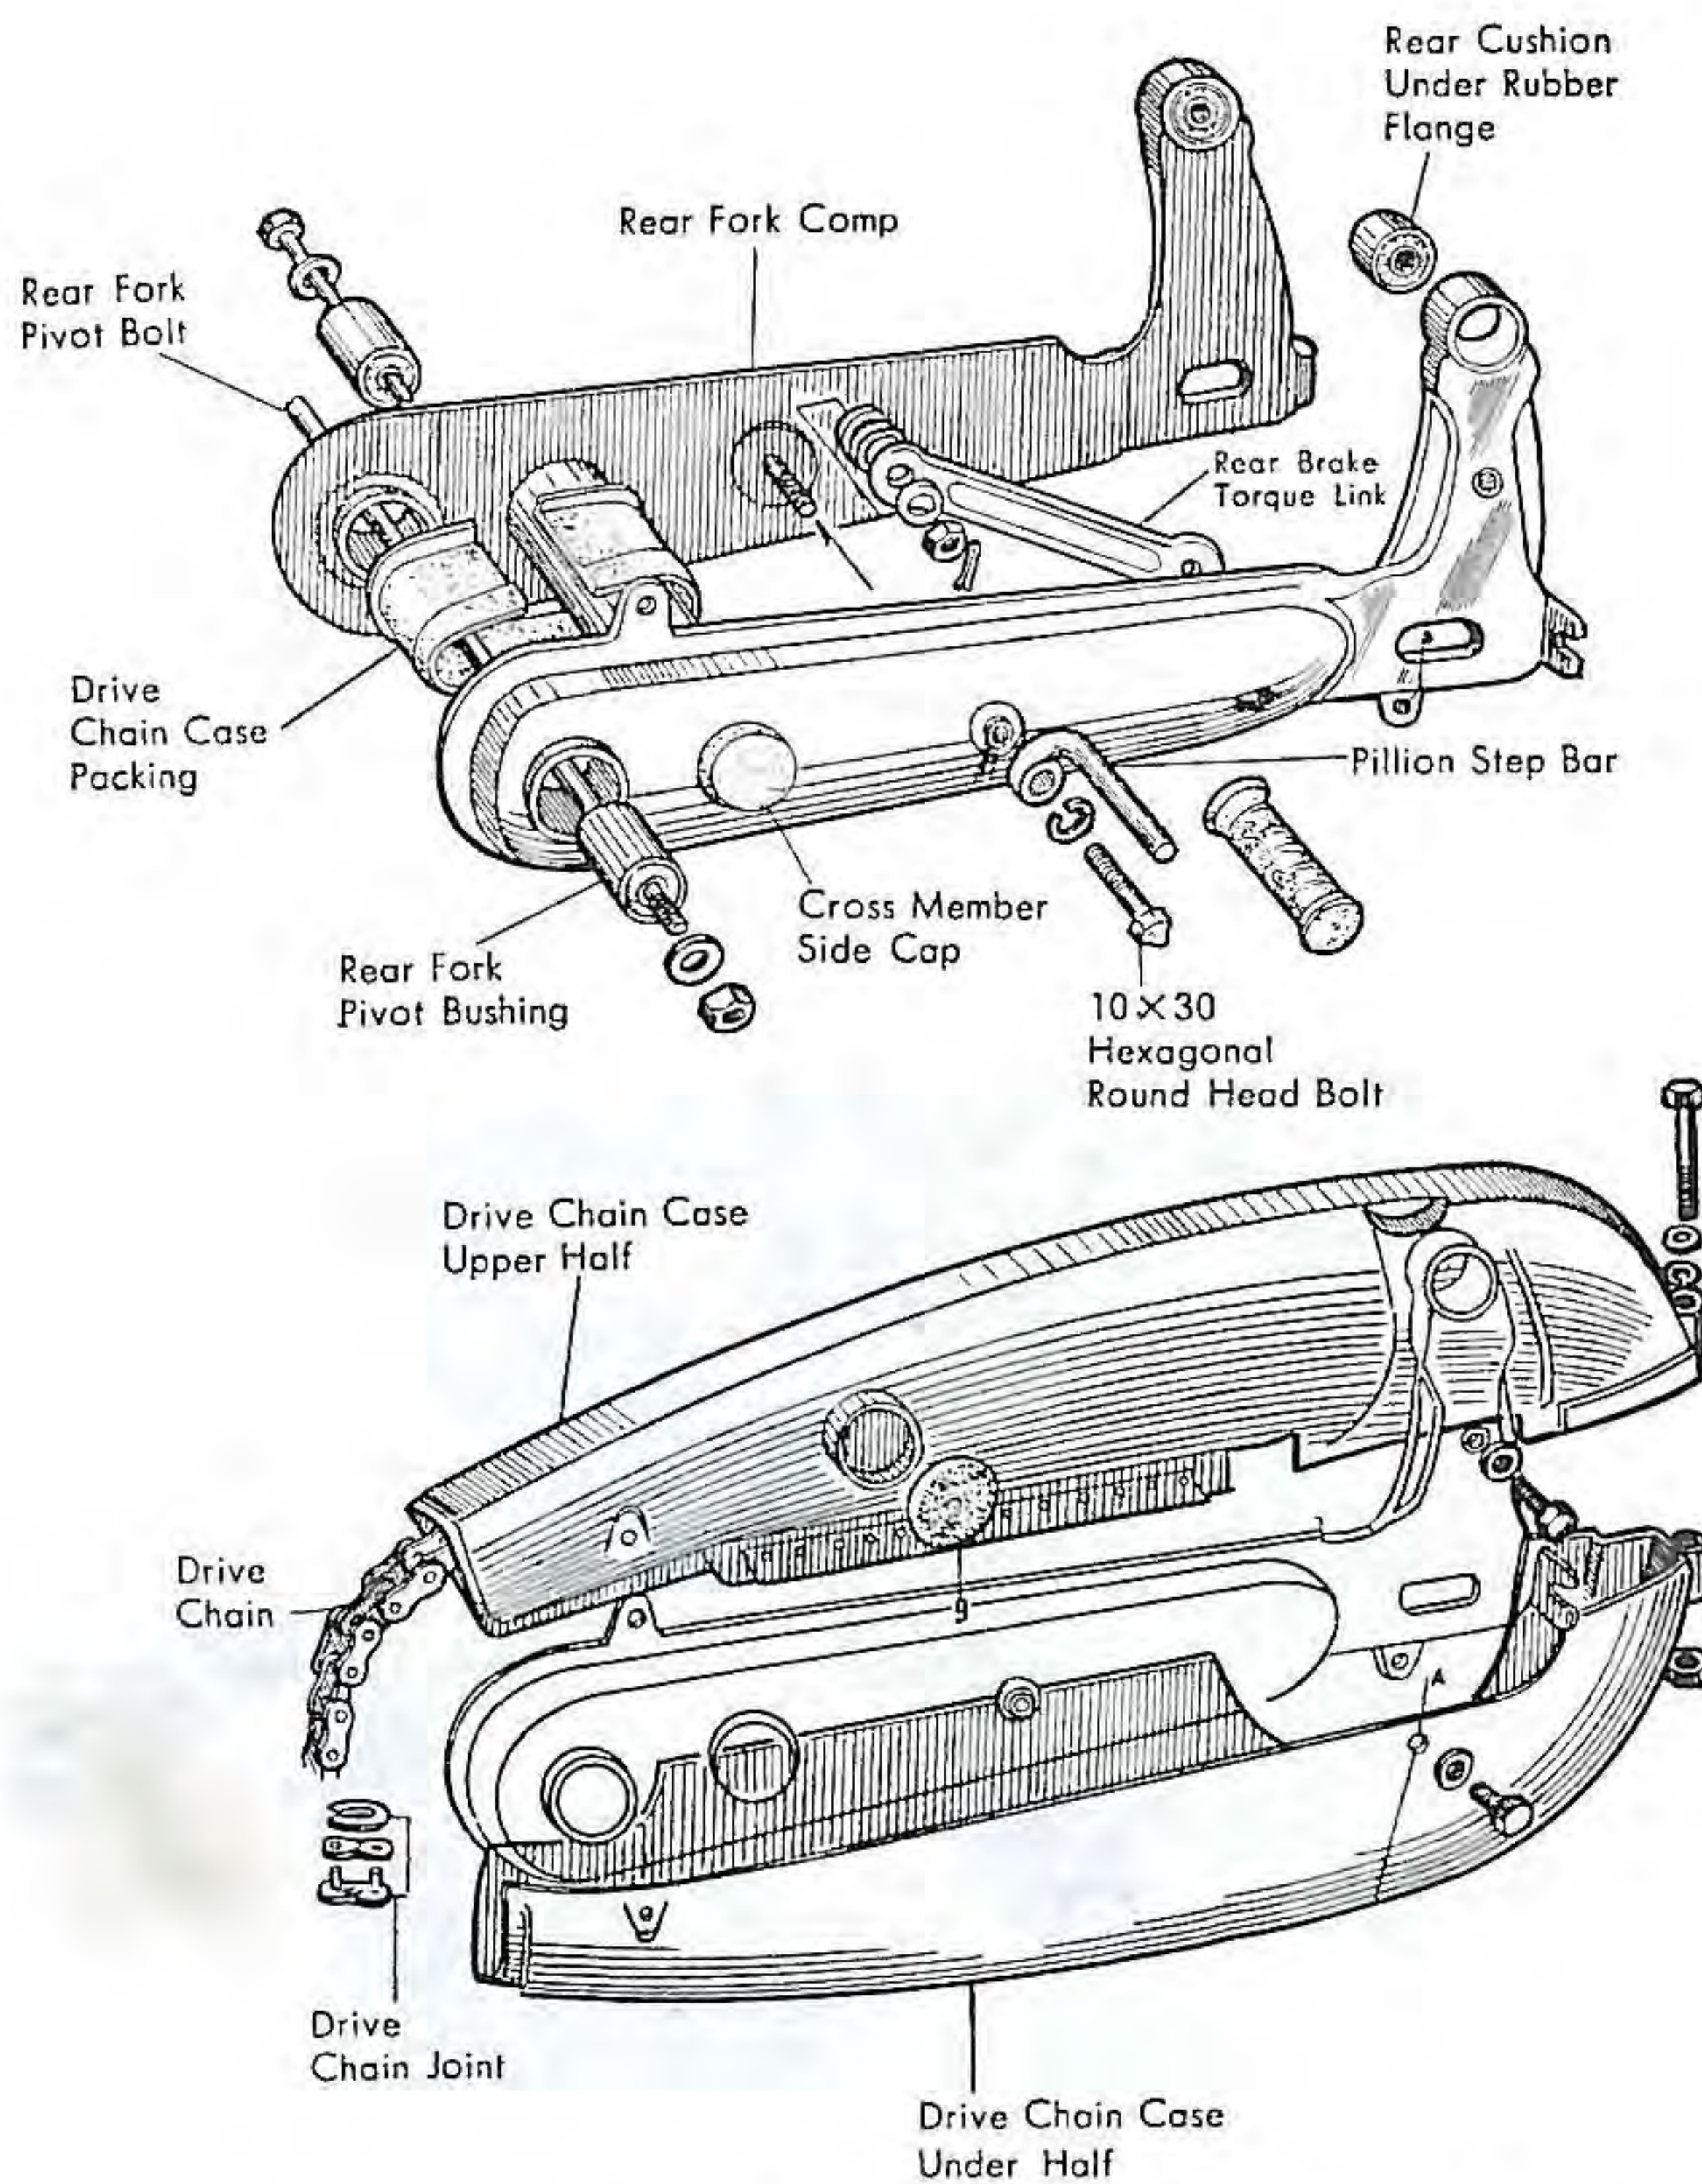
Exploded view of rear fork and chain case (C92 & CA95)
